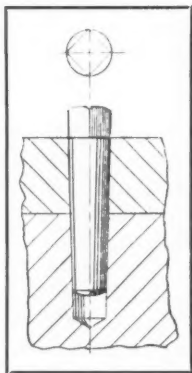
Drawing of taper pin having one end milled square to accommodate wrench.
